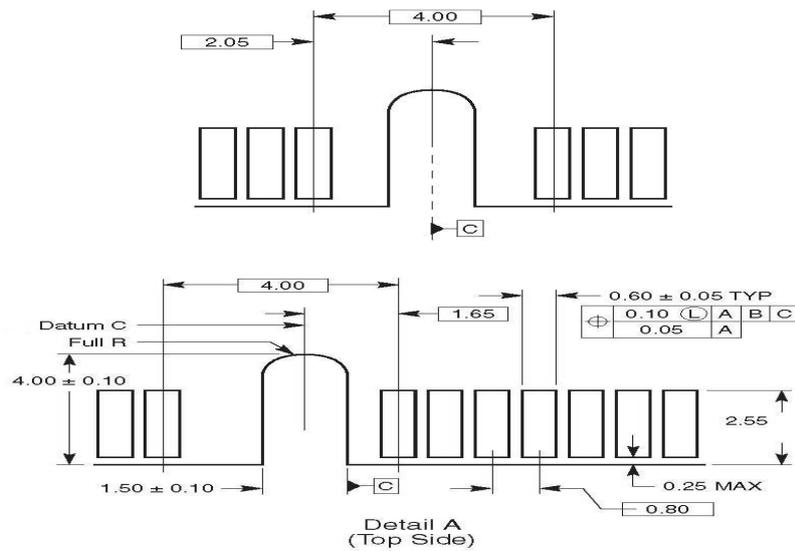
2 TOP and BOTTOM of Goldfinger Detail A&B
